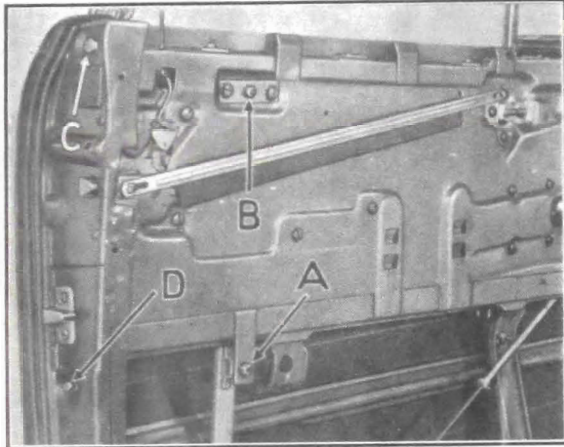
Showing where to adjust the lock pillar glass run channel and door window guide.
